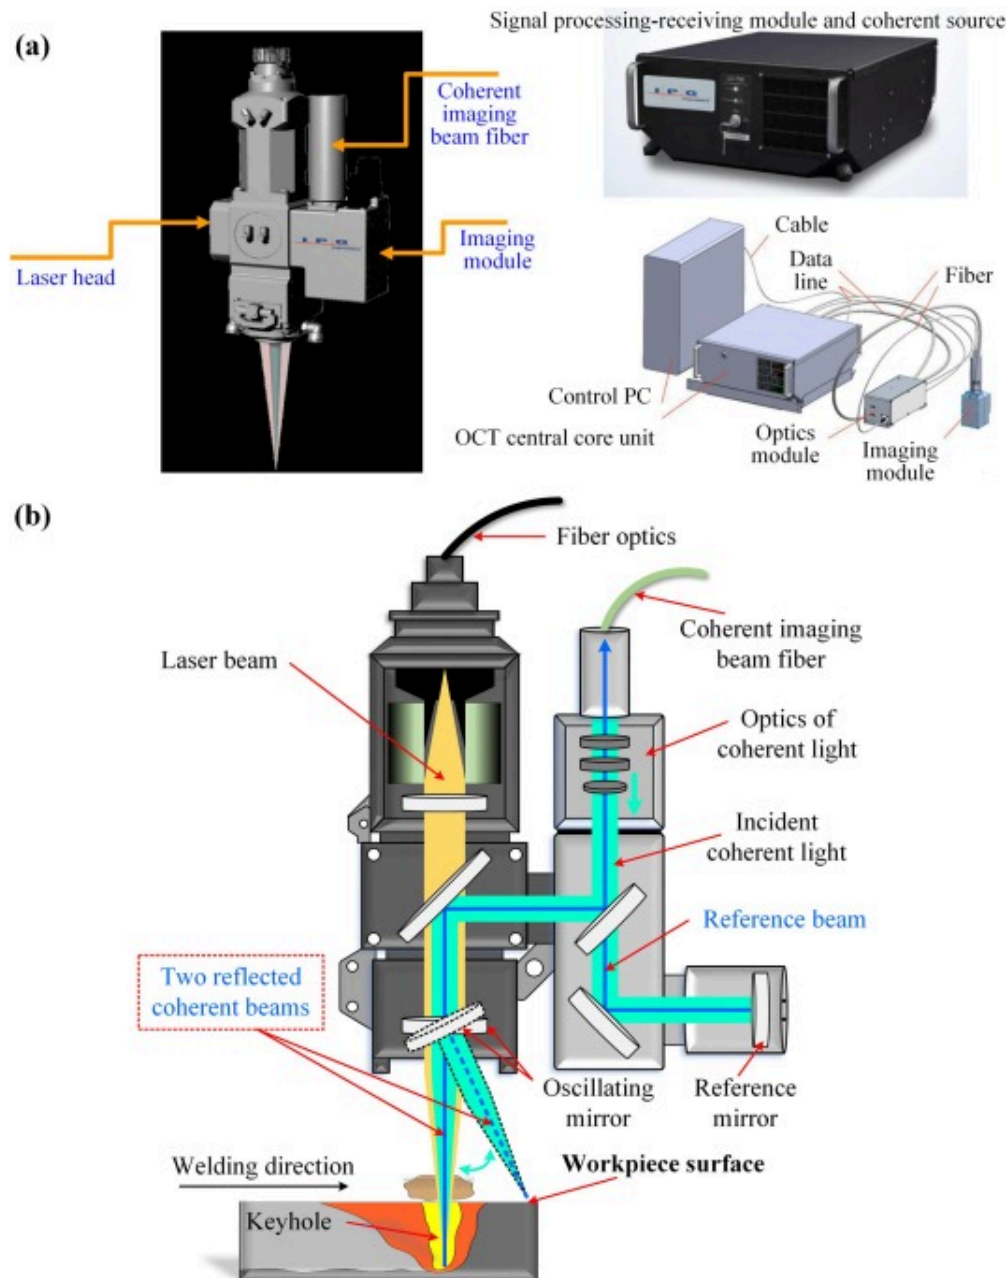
The stainless steel laser lap welding platform and penetration depth monitoring system.
